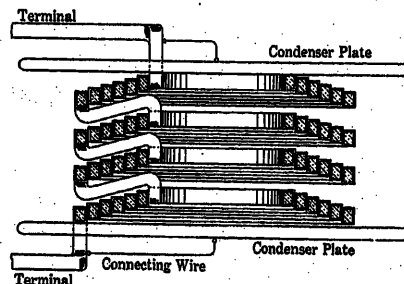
MULTICOIL WINDING OF TYPE SIMILAR TO THAT SHOWN IN FIG. 7, THE COILS BEING CONICAL IN SHAPE INSTEAD OF CYLINDRICAL
